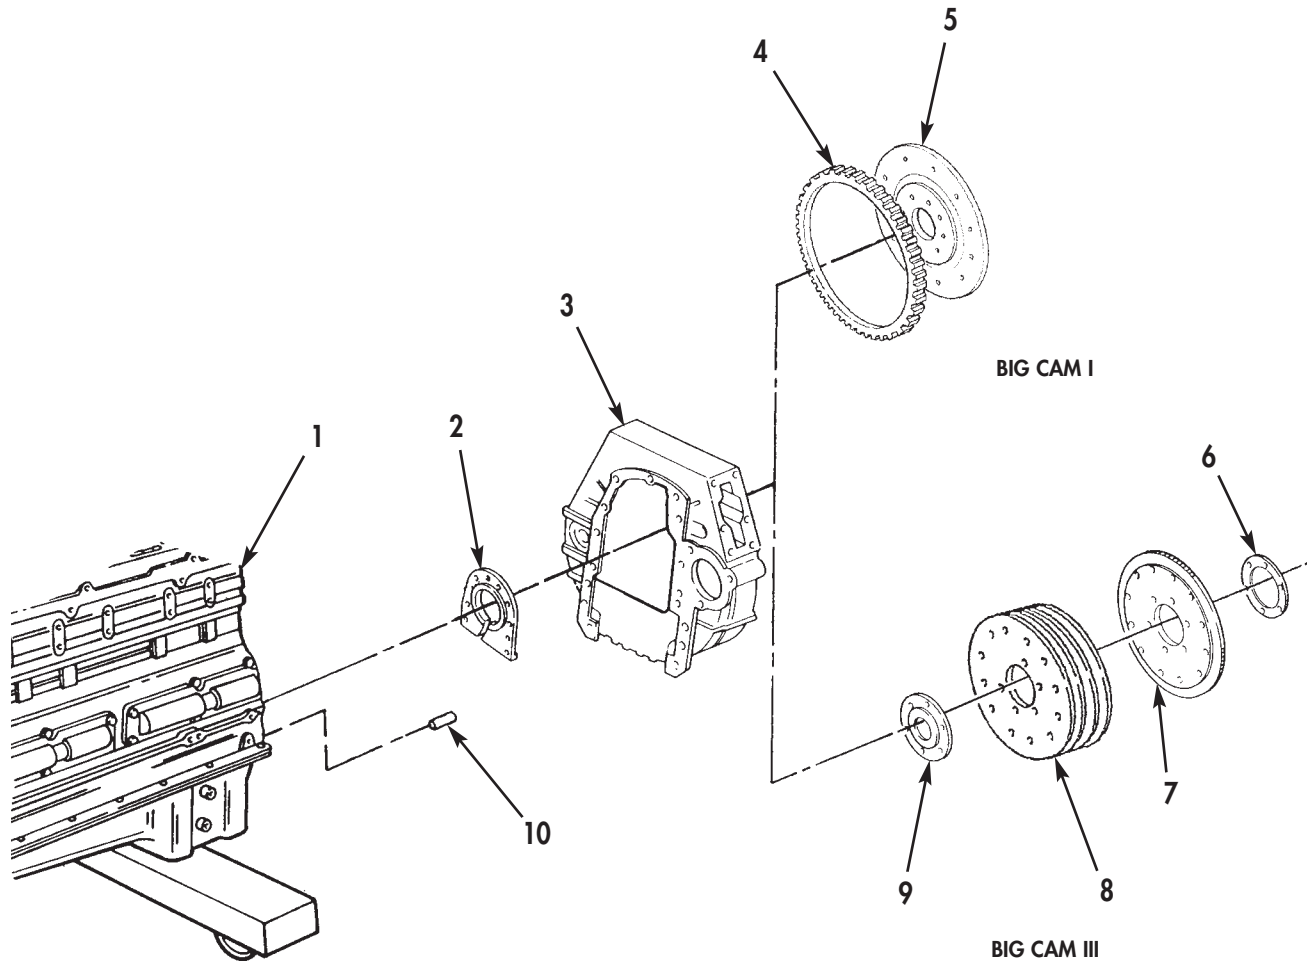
Flexplate, Flywheel, Flywheel Housing, and Rear Cover Cleaning and Inspection.
